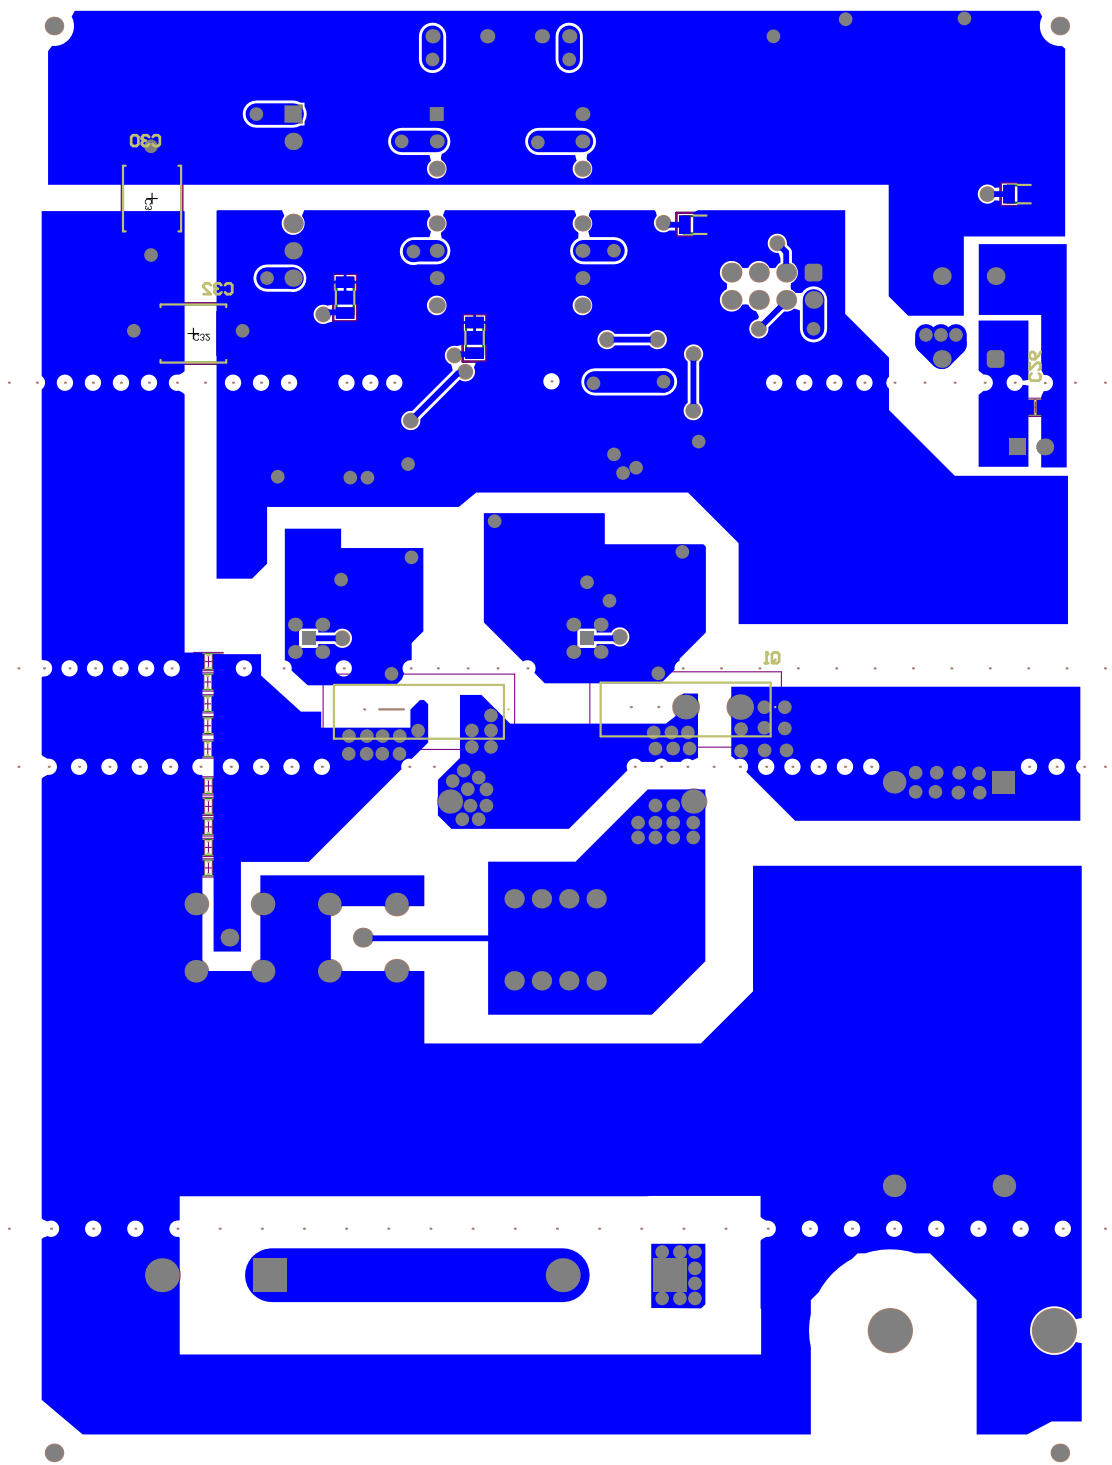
PCB "Eco1" with a 25% hole-based perforation strategy, bottom side.
